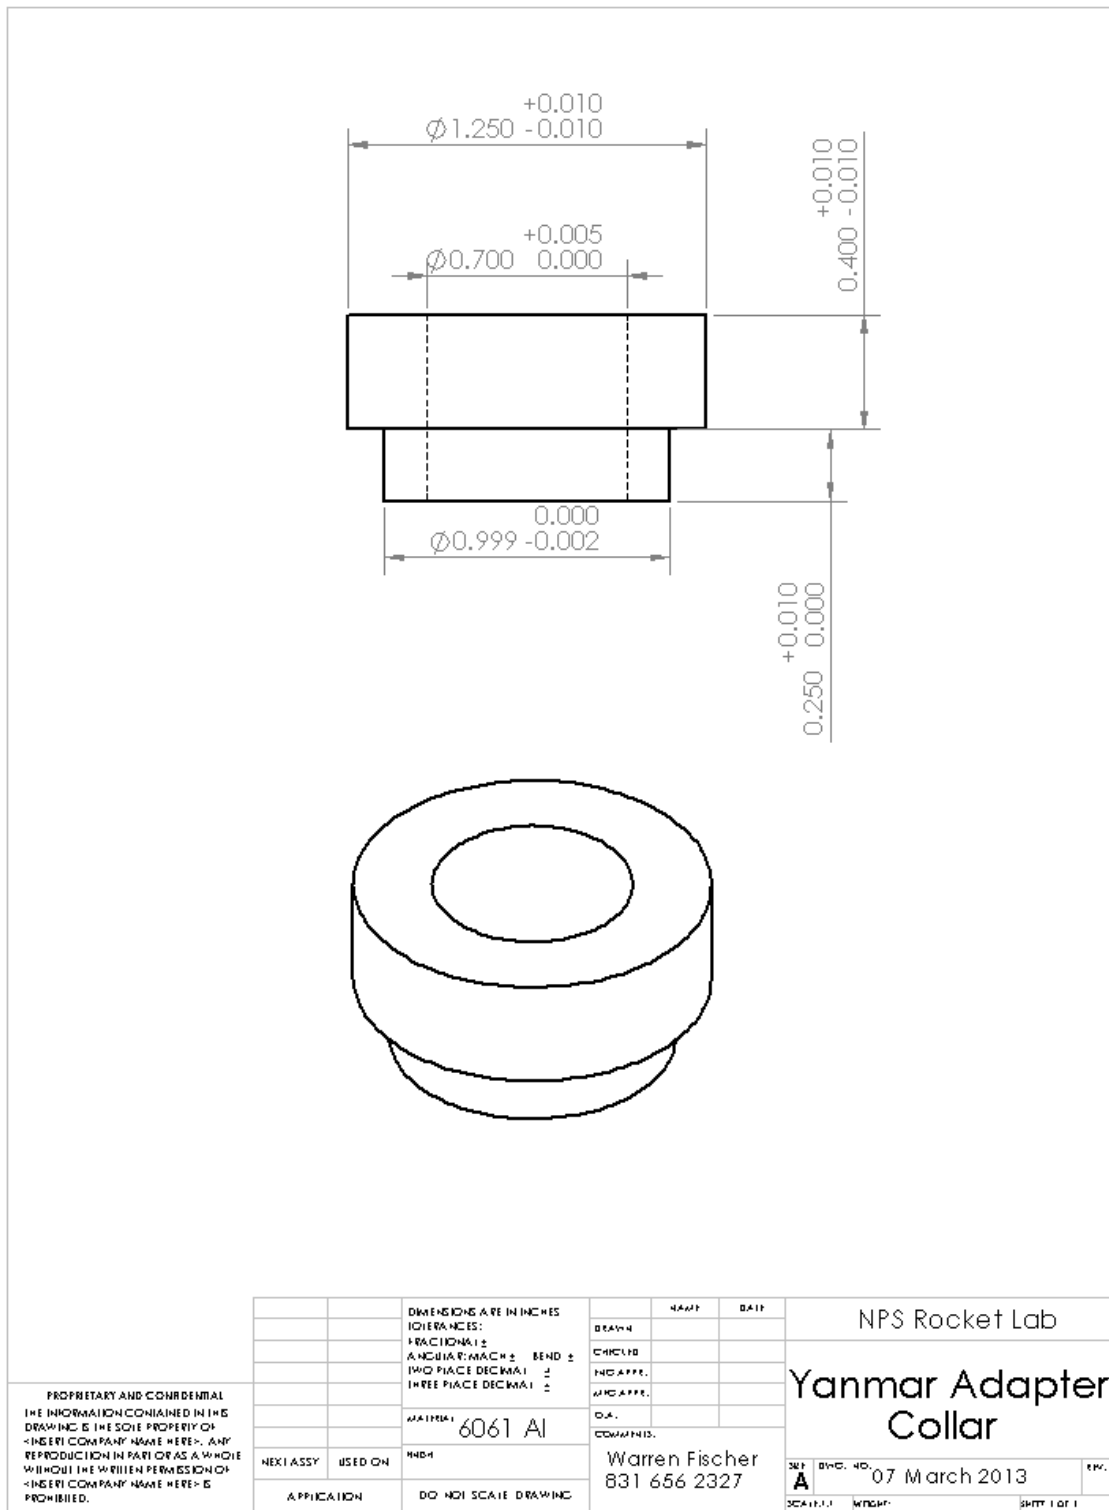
Yanmar Injector Adapter Collar Fabrication Drawing
